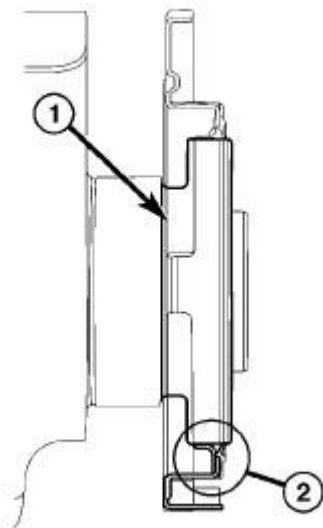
CRANKSHAFT OIL SEAL - REAR
